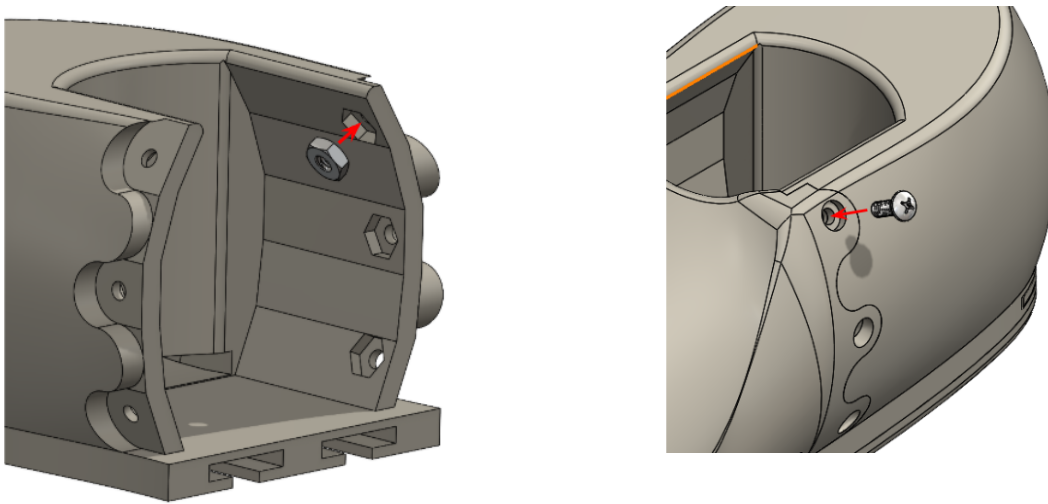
Interlocking Seam Design showing bolt nut and bolt connections.
